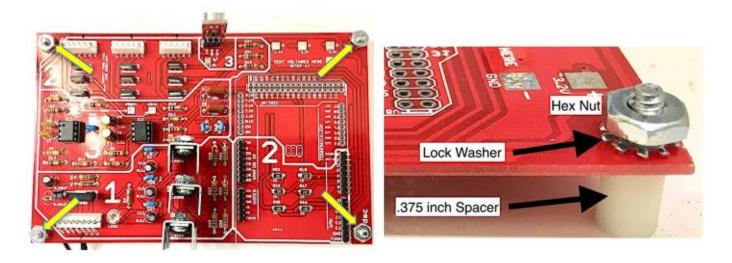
Locations of corner mounting screws and assembly of hardware for PWB attachment.
